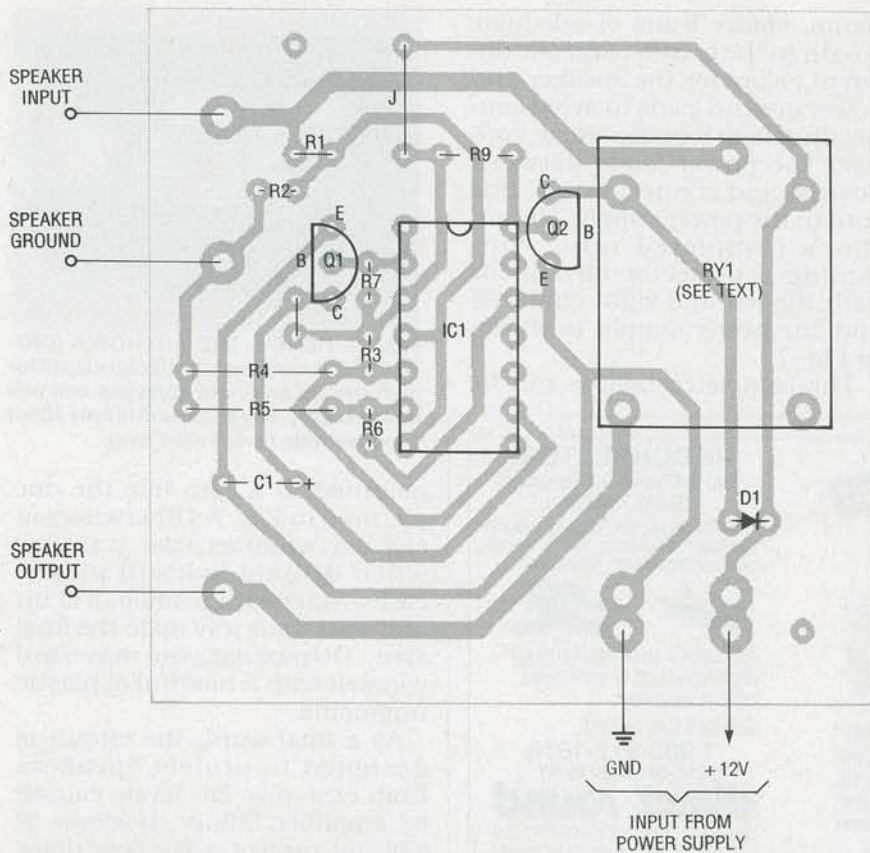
PARTS-PLACEMENT DIAGRAM for the protector circuit. The 5-amp relay will mount right on the board, while the 15-amp relay must be mounted on the edge of the board using double-sided tape.
